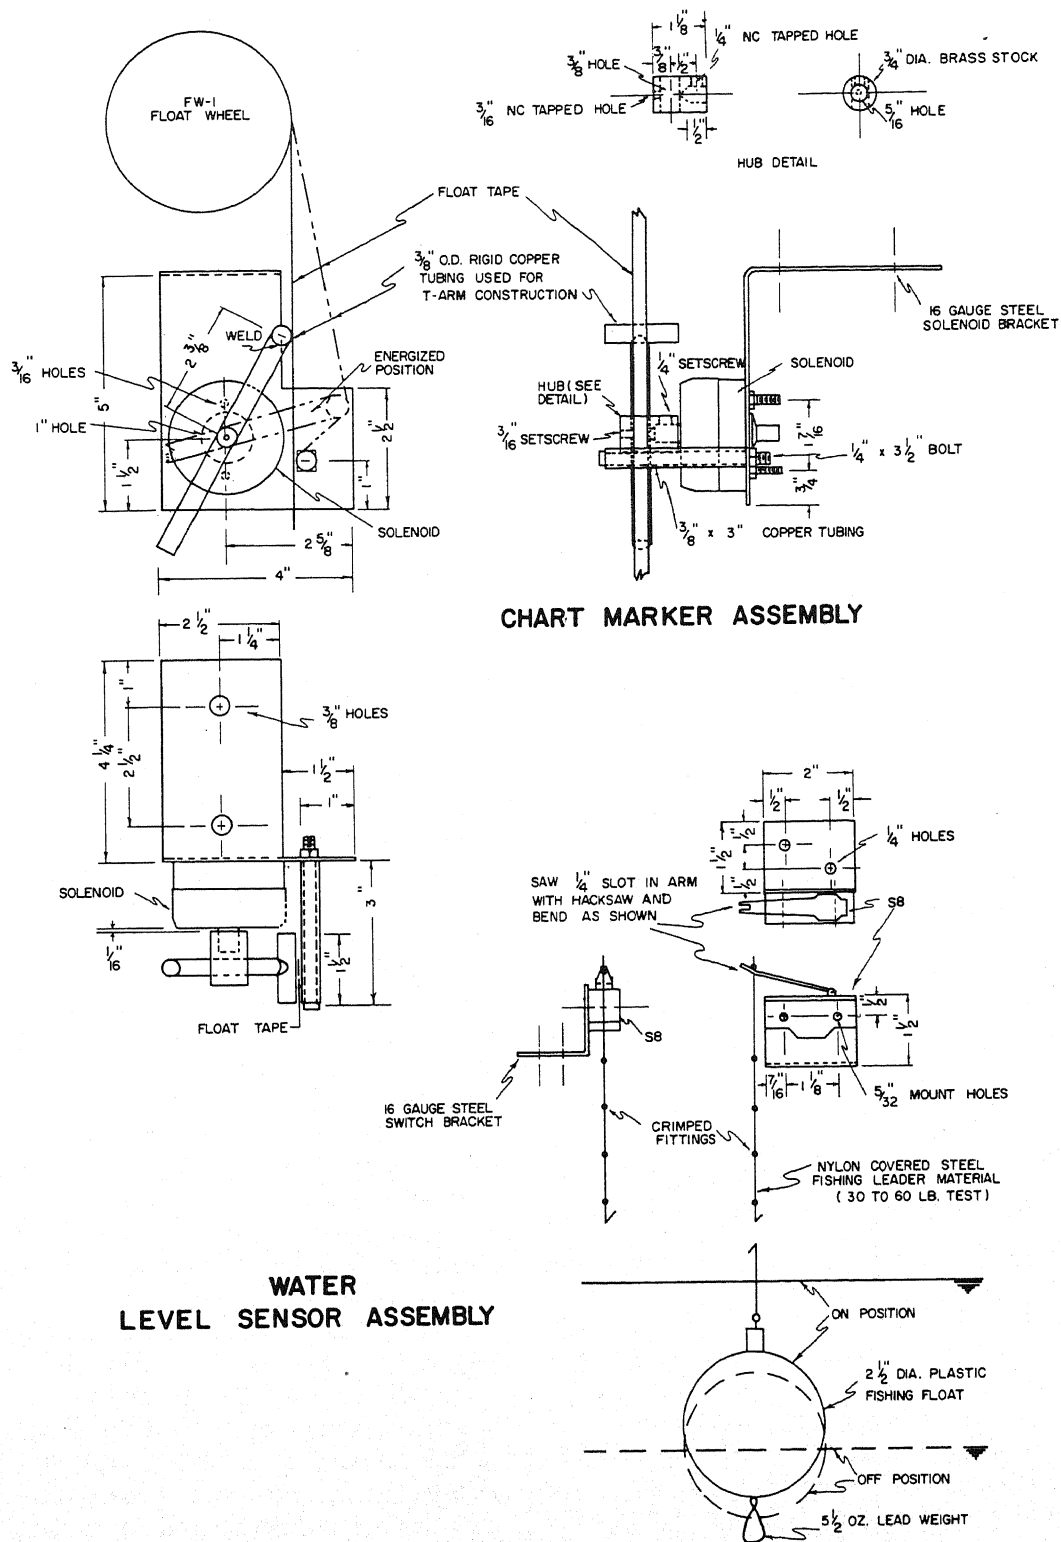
Chart marker assembly and water-level sensor assembly.
